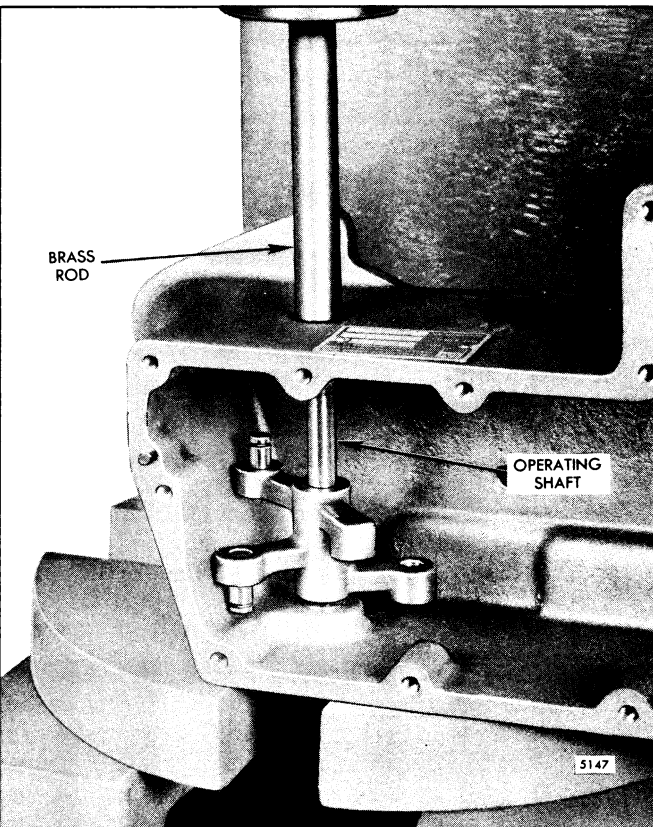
Removing Operating Lever Shaft and Enclosed Bearing Assembly
